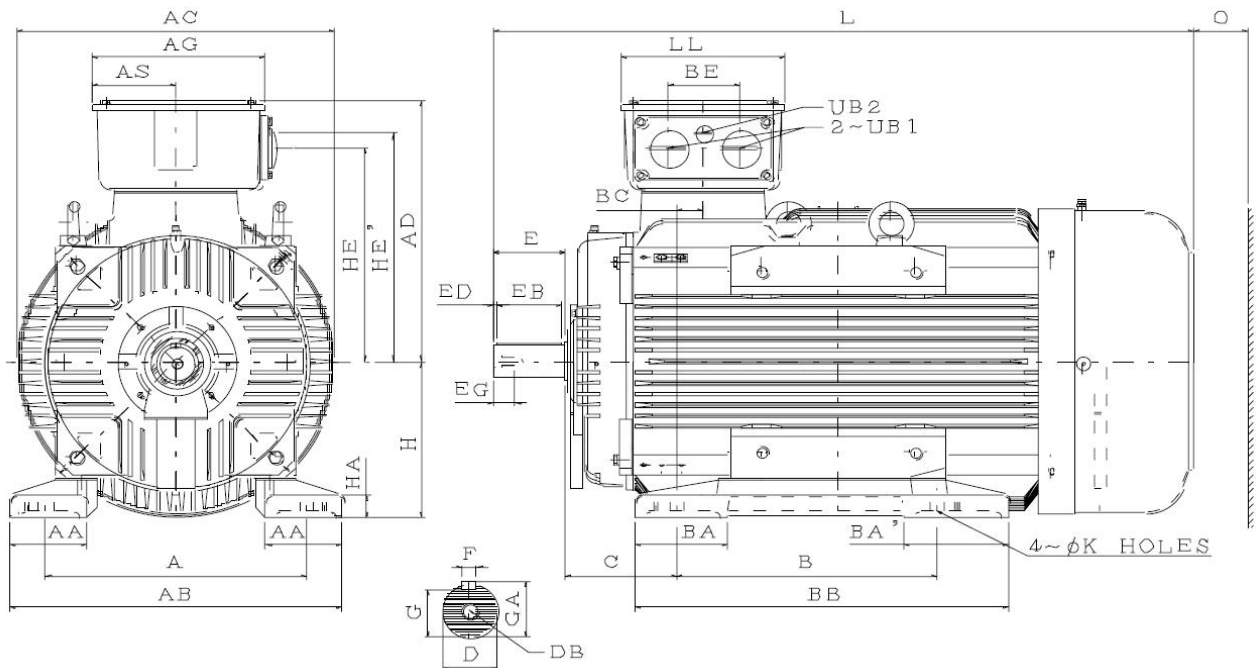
Outline drawing of cast iron design, feet version, mounting B3; frame size 315L
